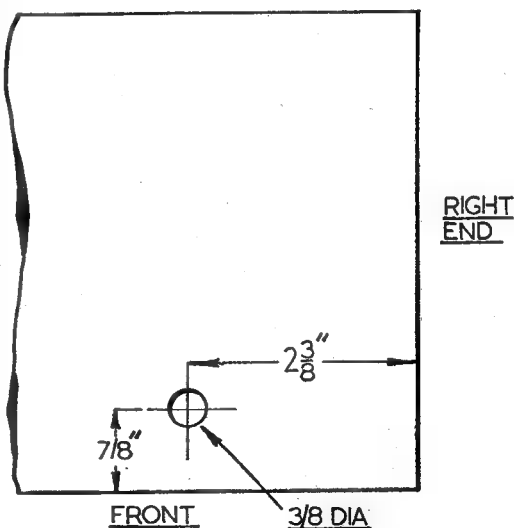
Location of the vice clamp-bolt, in the base plate
